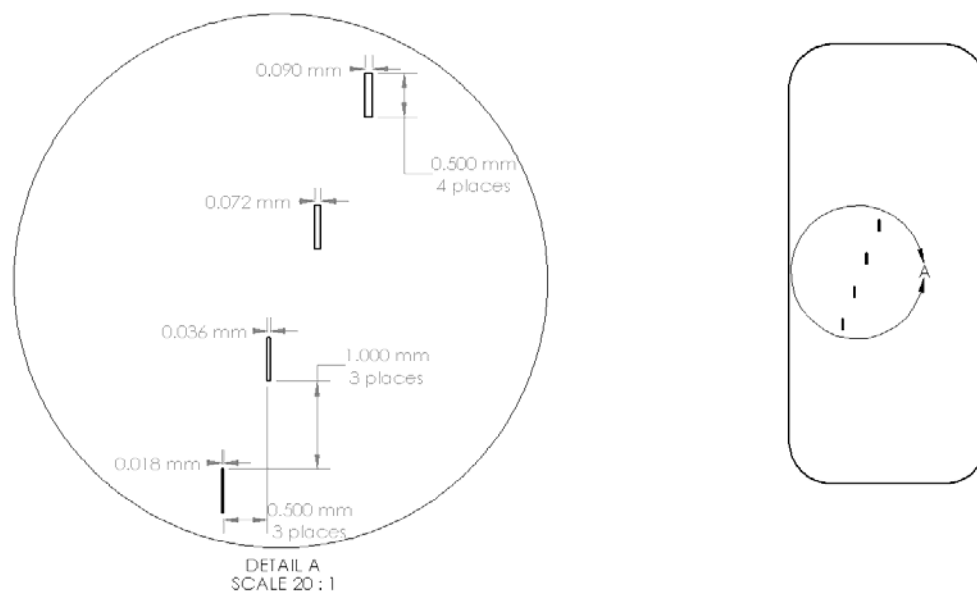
Mechanical CAD drawing of multi-slit plate rev 2.
